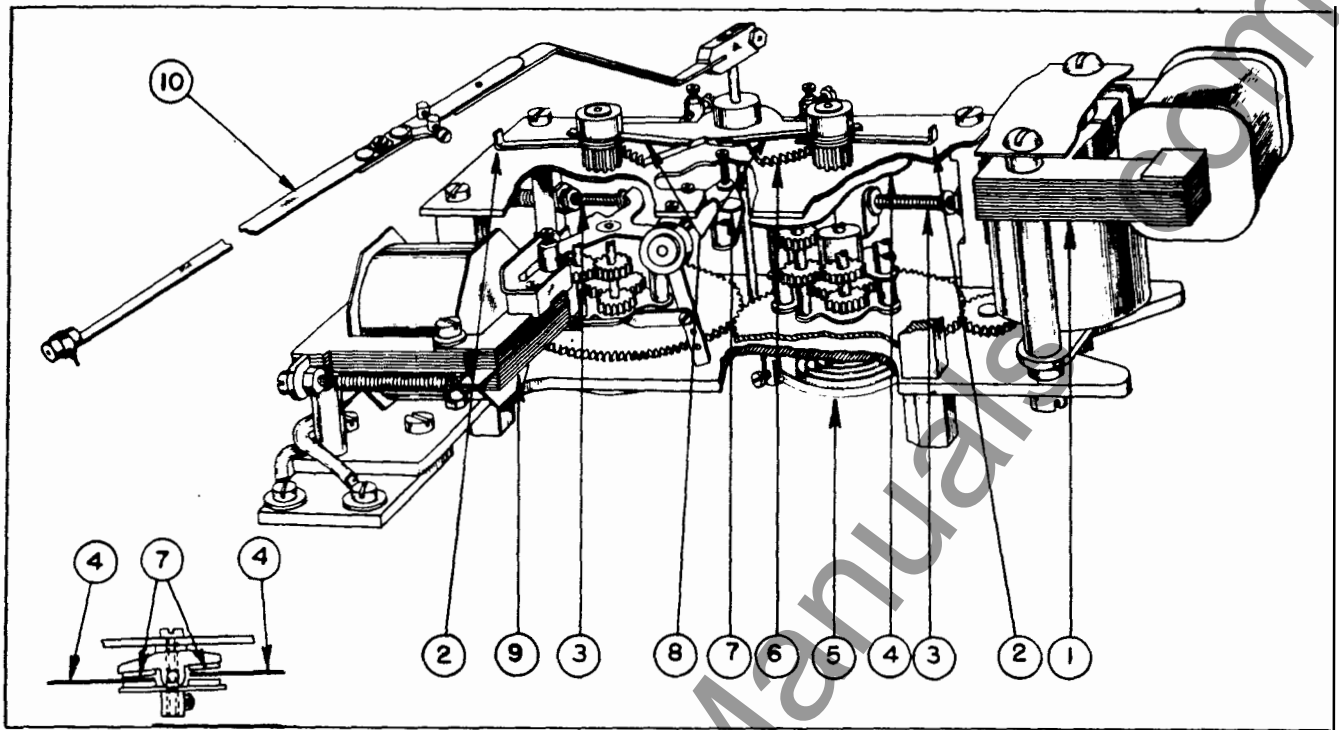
DETAILS OF MODEL M METAMETER RECEIVER MOVEMENT
